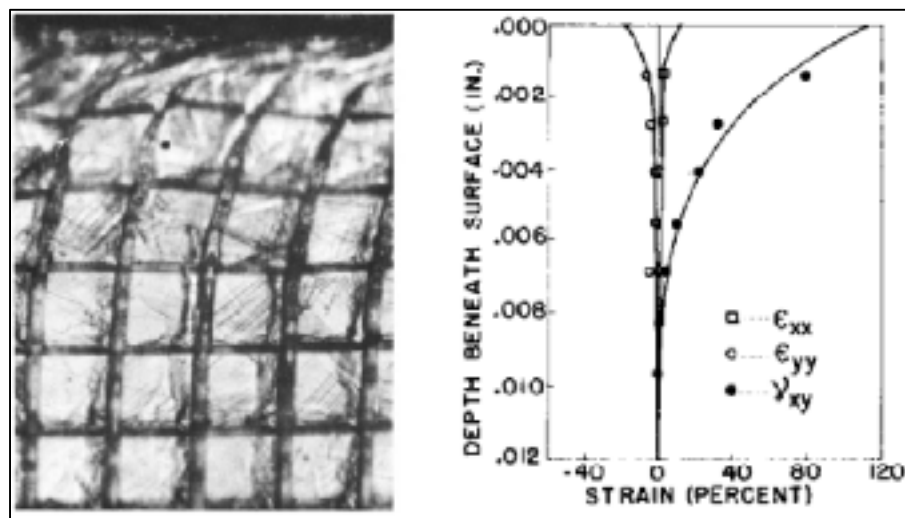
Measurement of plastic strain using micro-grid technique for machined copper workpiece (Bailey et Jeelani, 1976)
